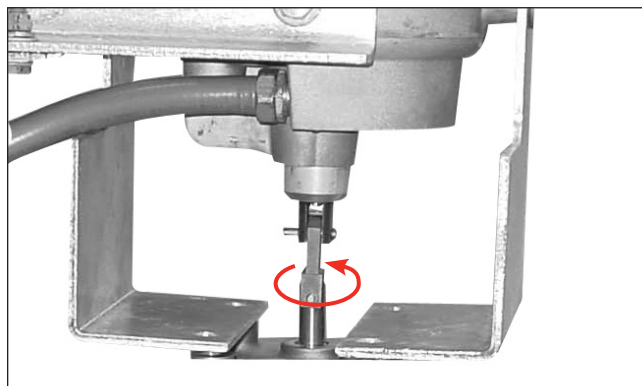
Manually rotate the operating shaft until the motor can be easily disengaged.
